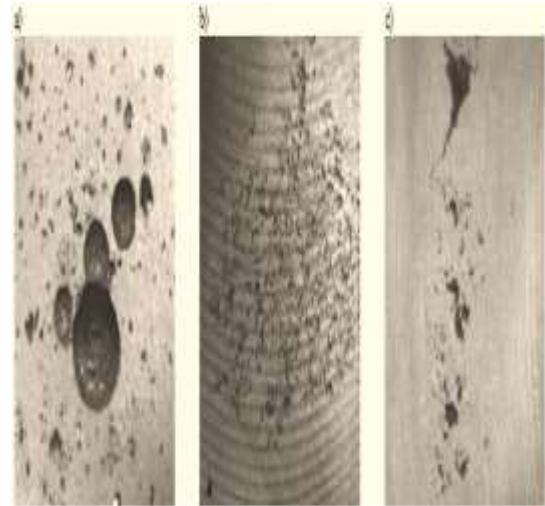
Example of different types of defects revealed on the casting surface after machining
